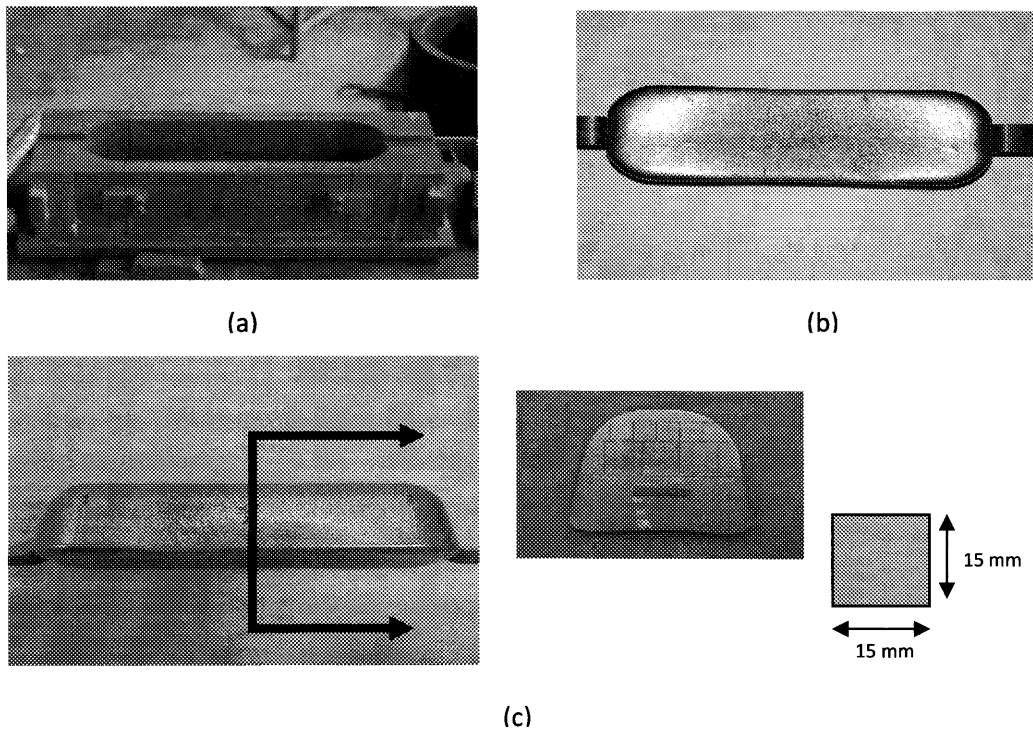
(a) Cast iron mold (b) Aluminium casting product (c) Cutting part
